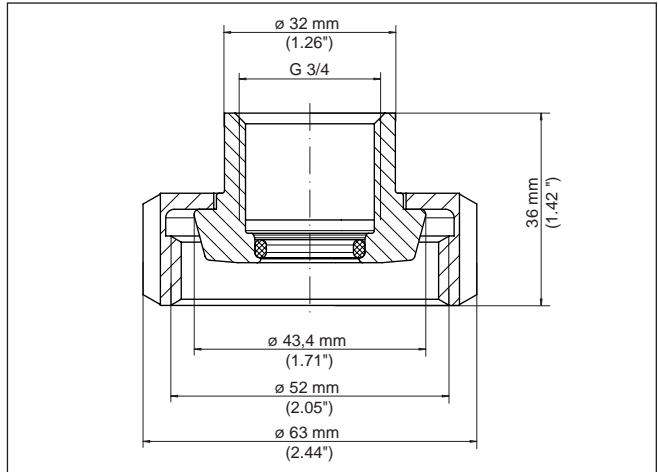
Dimensions of threaded adapter G $\frac{3}{4}$ (DIN 3852-X) on slotted nut DN 25 (DIN 11851) PN 25
